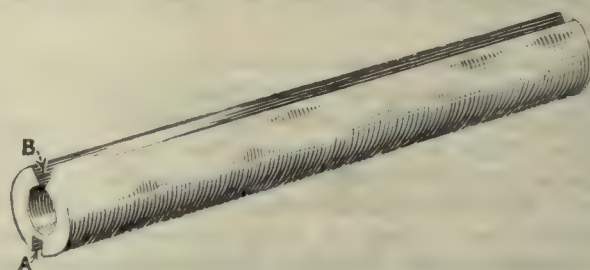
ADAPTER FOR HOLDING ODD-SIZED WIRES
